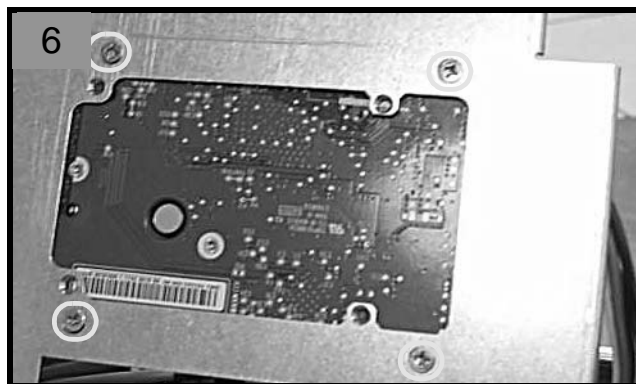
Disk Drive Removal (Part 1 of 2)
